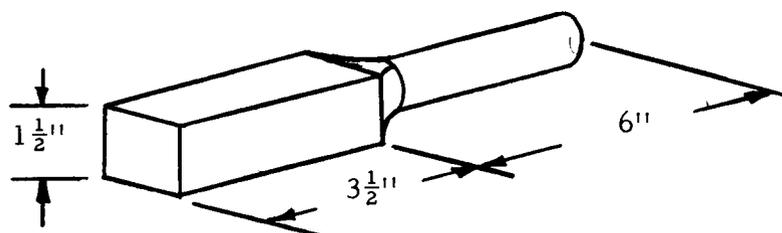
Hammer with cylindrical handle and rectangular-shaped head.
